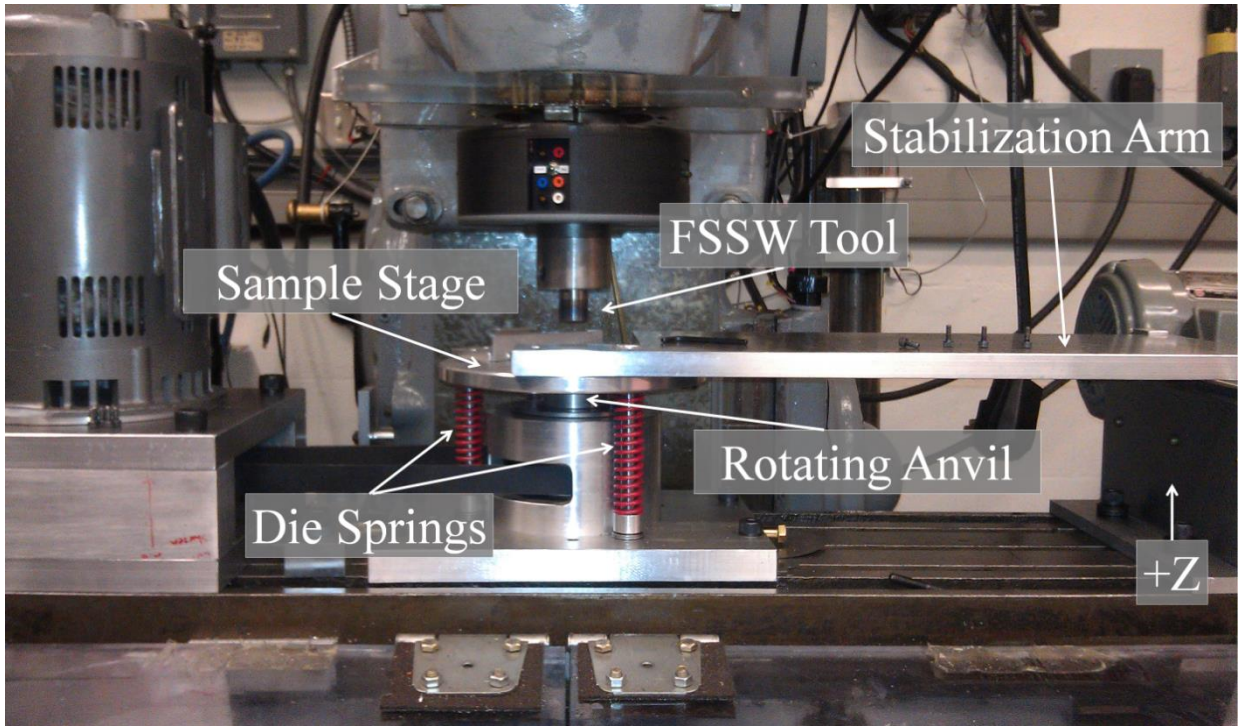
The RAFSSW device. The FSSW tool receives power from the main spindle of the FSW machine. The rotating anvil assembly, stabilization arm and 7.5 HP motor are all mounted to the stage of the FSW machine. The vertical actuation of the RAFSSW device is achieved through a simple combination of the vertical drive of the FSW machine and the floating stage.
